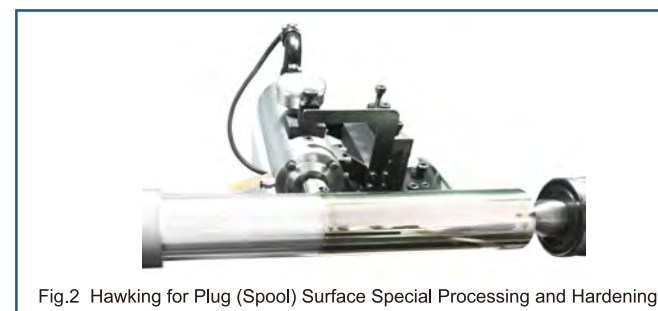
Hawking for Plug (Spool) Surface Special Processing and Hardening
